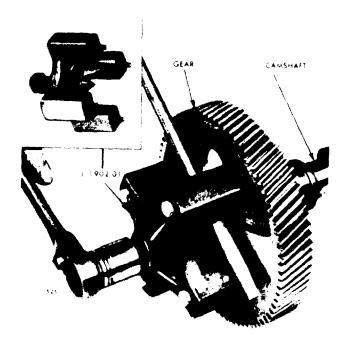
B-160. Removing Gear (Camshaft or Balance Shaft)
